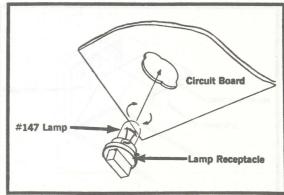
PC board lamp replacement. Turn the lamp assembly counterclockwise to remove and clockwise to install.
